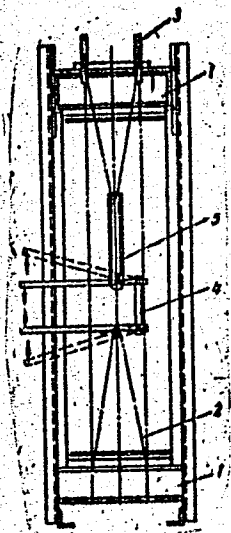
1- crosspieces; 2- cable; 3- yoke;
